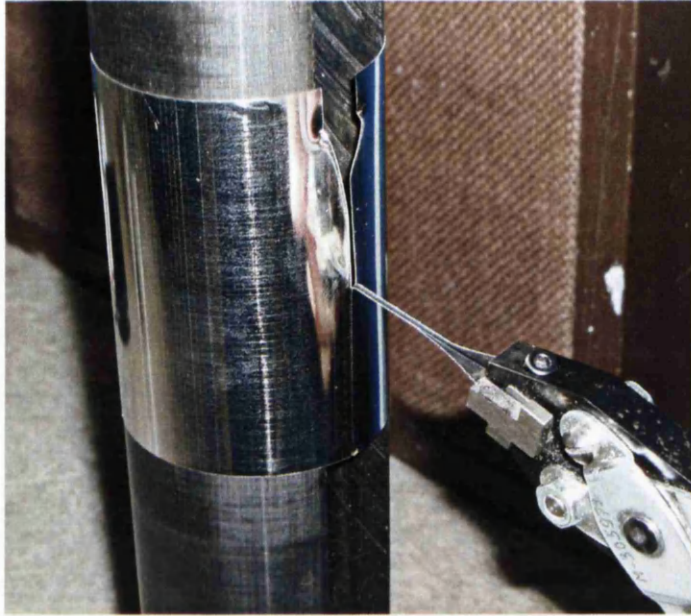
picture of a rip test where the weld is pulled out from the can body to indicate strength using specially adapted pillars.
